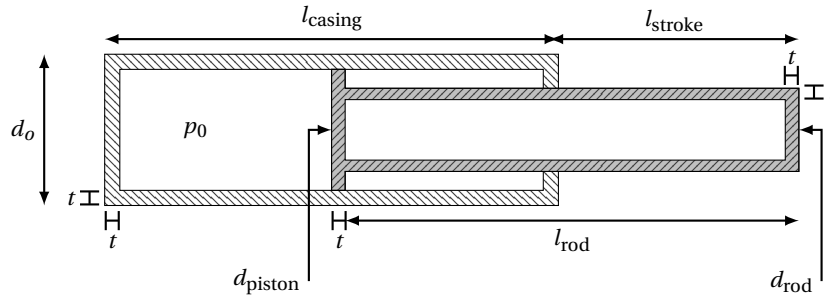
Schematic drawing of the dimensioned cylinder.
